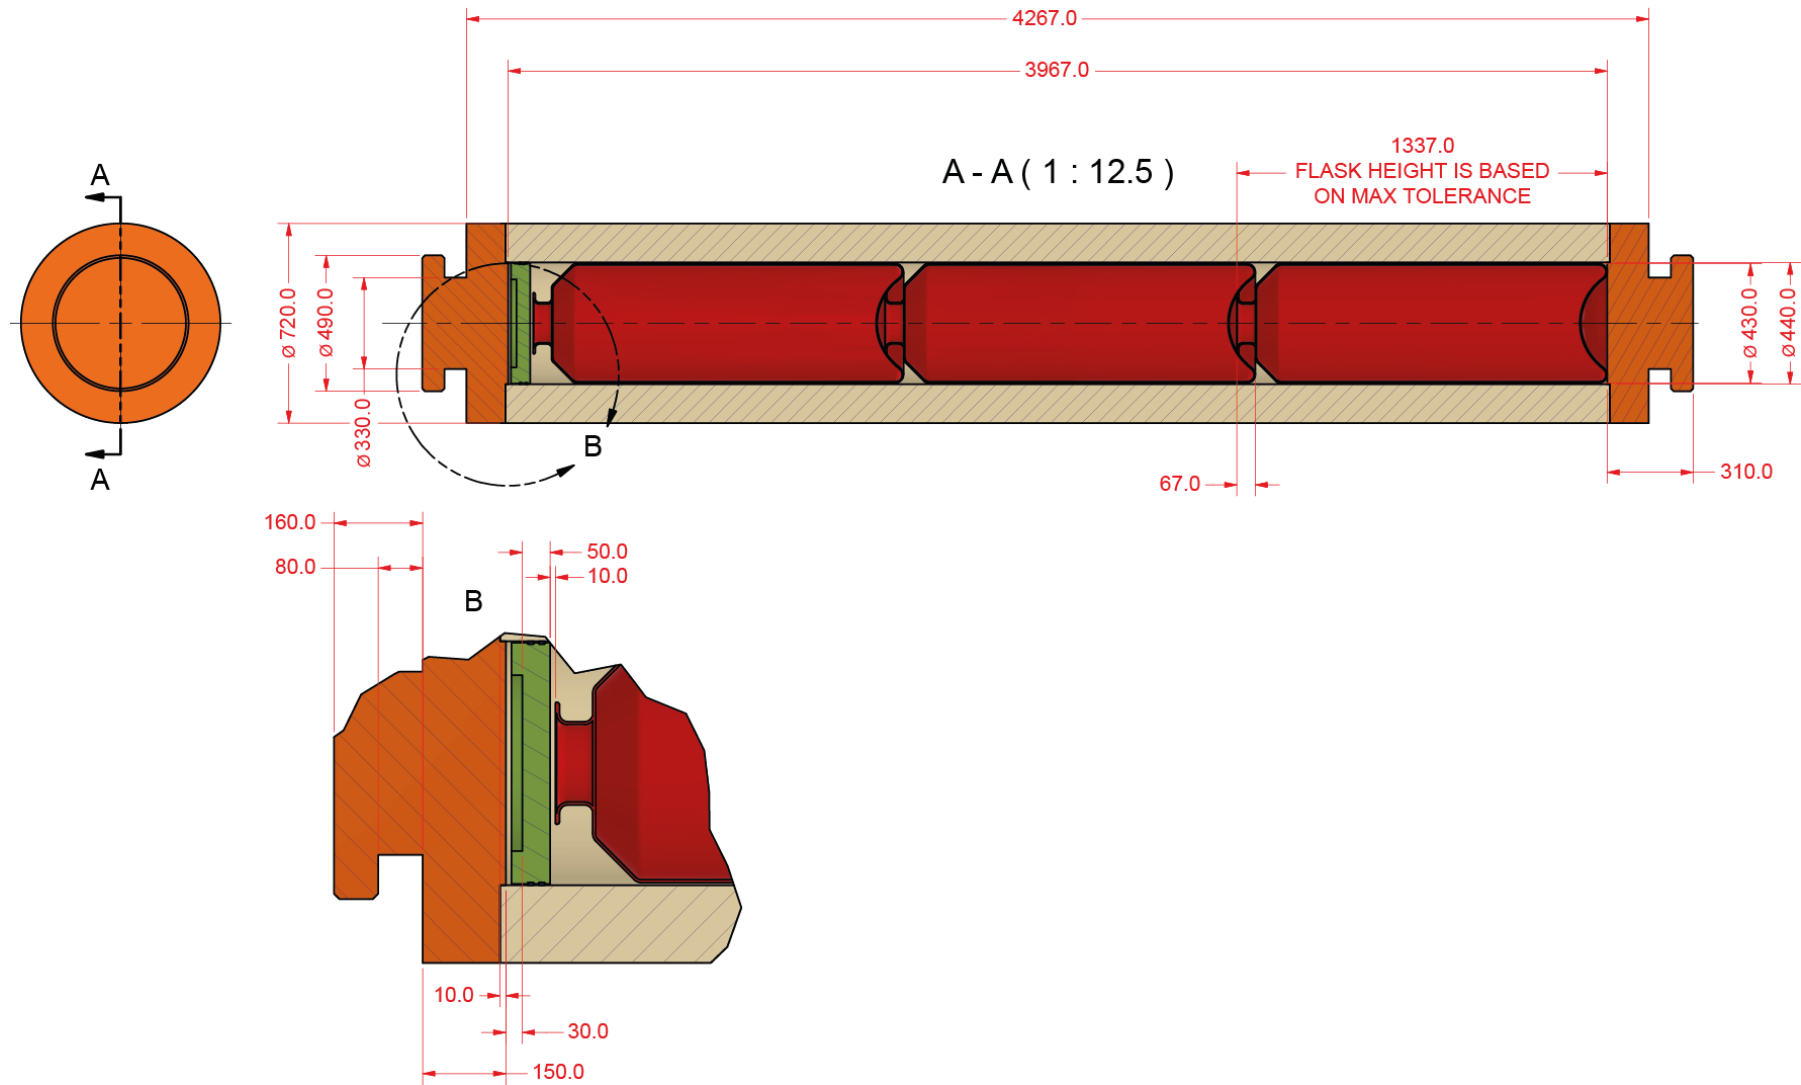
Engineering drawings of a loaded RP-HLW disposal canister
